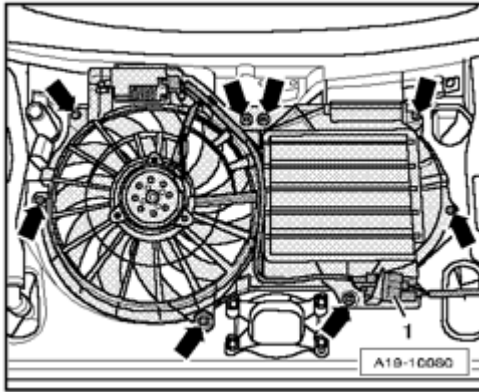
Removing Bolts And Fan Shroud Upward/Out
